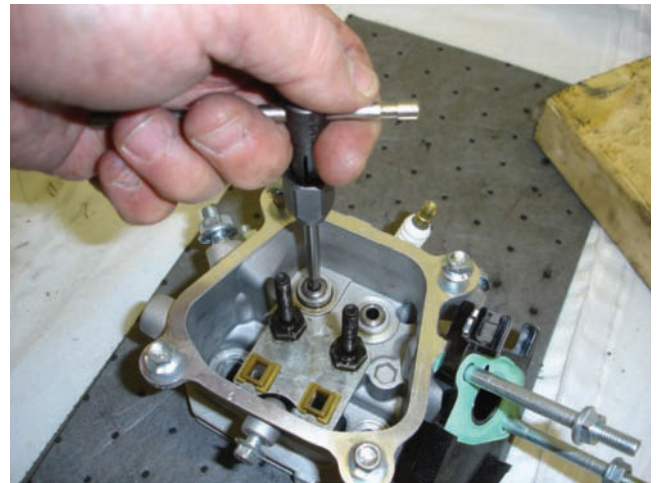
Using a valve guide reamer is necessary after installing a new guide.
